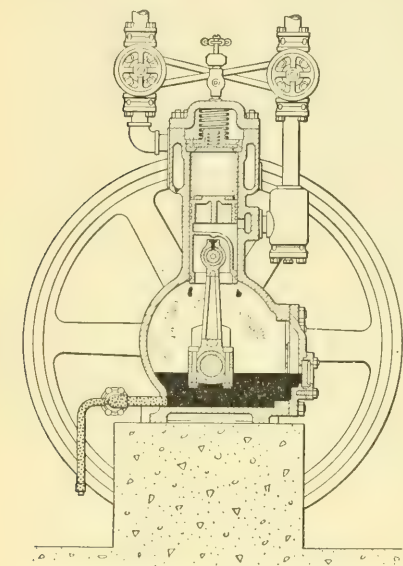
Lubrication; the Vertical Enclosed Compressor of 25 Tons and Less.
